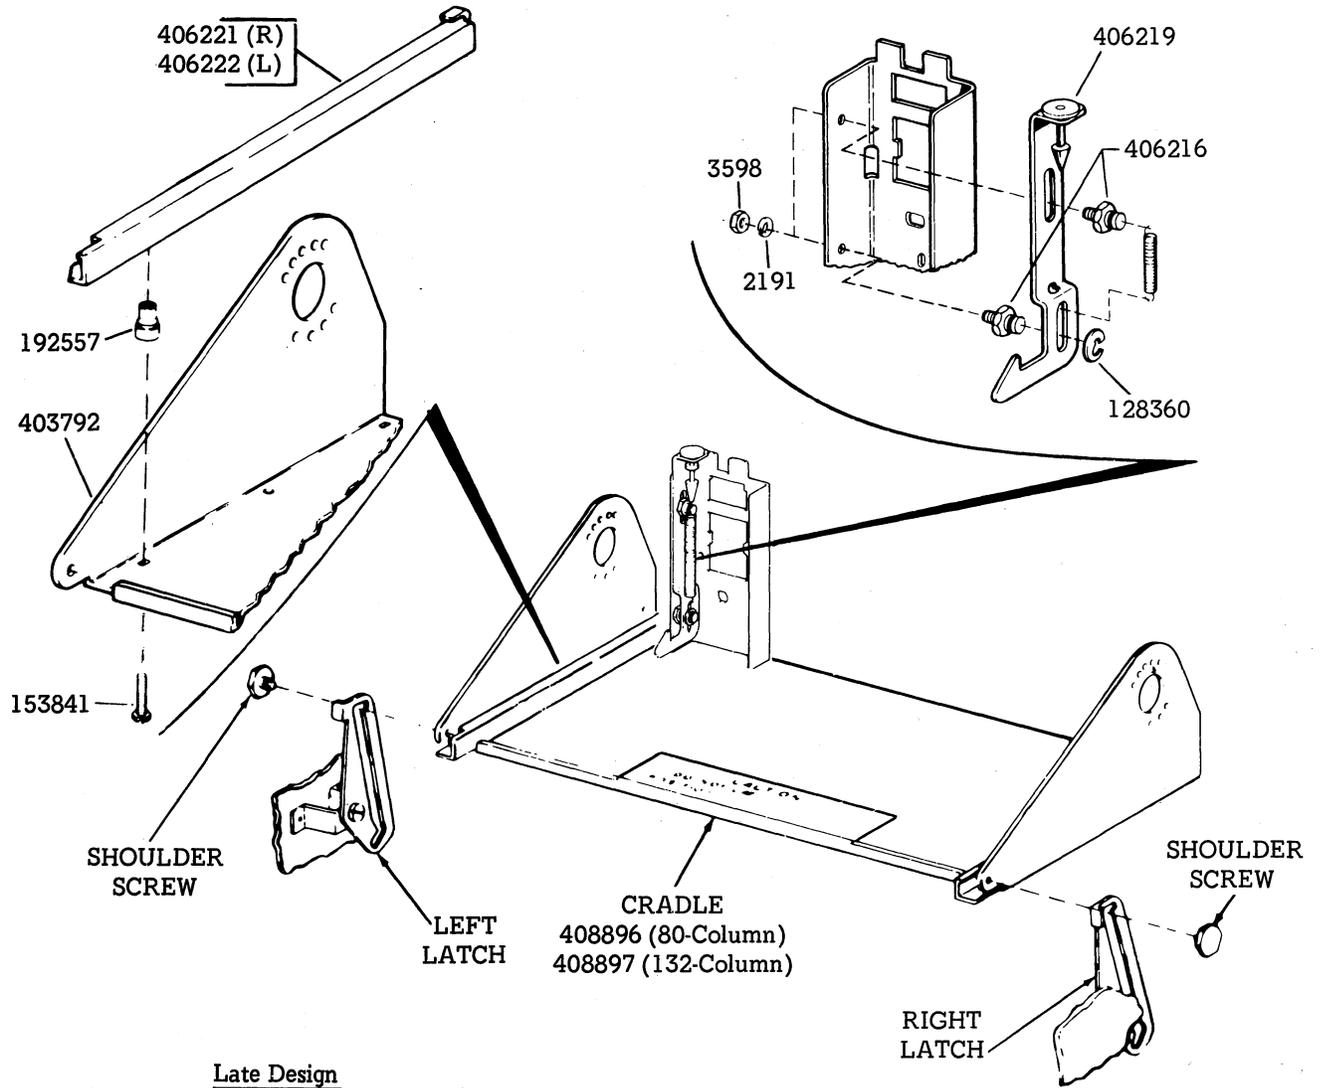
Cradle and Latch Mechanism for Adjacent or RO Tractor Feed Printer
